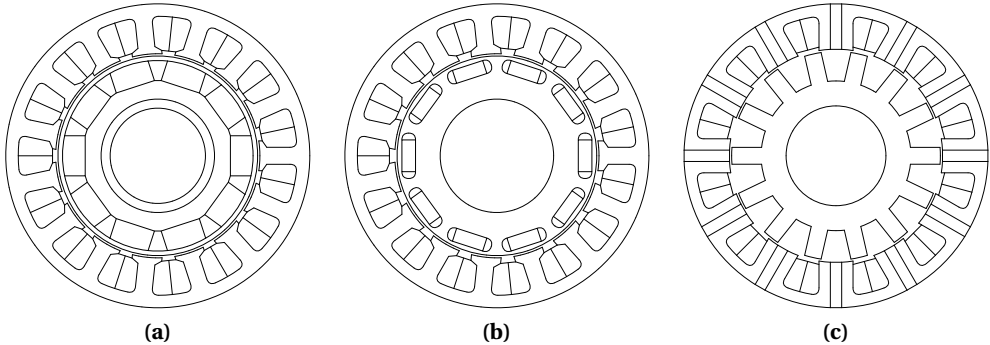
Three machine types: (a) Surface mounted magnets with retaining sleeve; (b) Buried (interior) magnets; (c) Flux switching machine.
